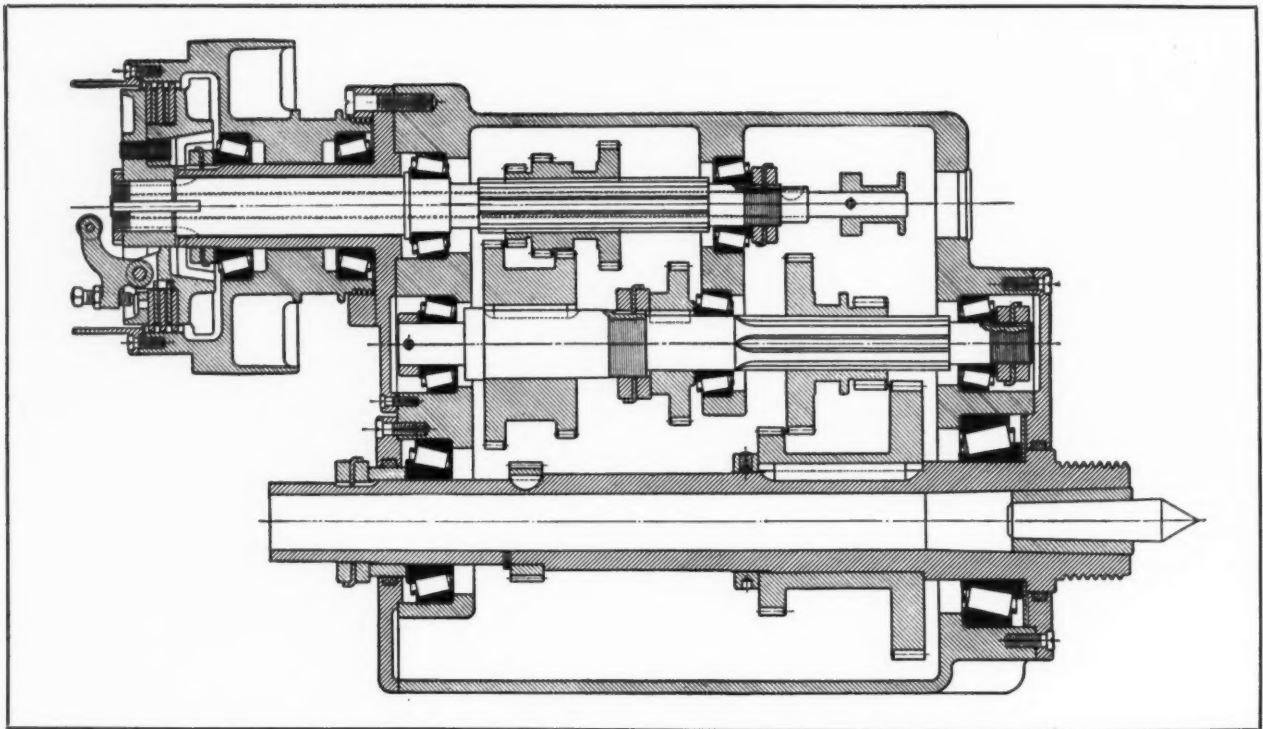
Lathe Headstock Illustrating what is Known as the Indirect Type of Roller-bearing Mounting
